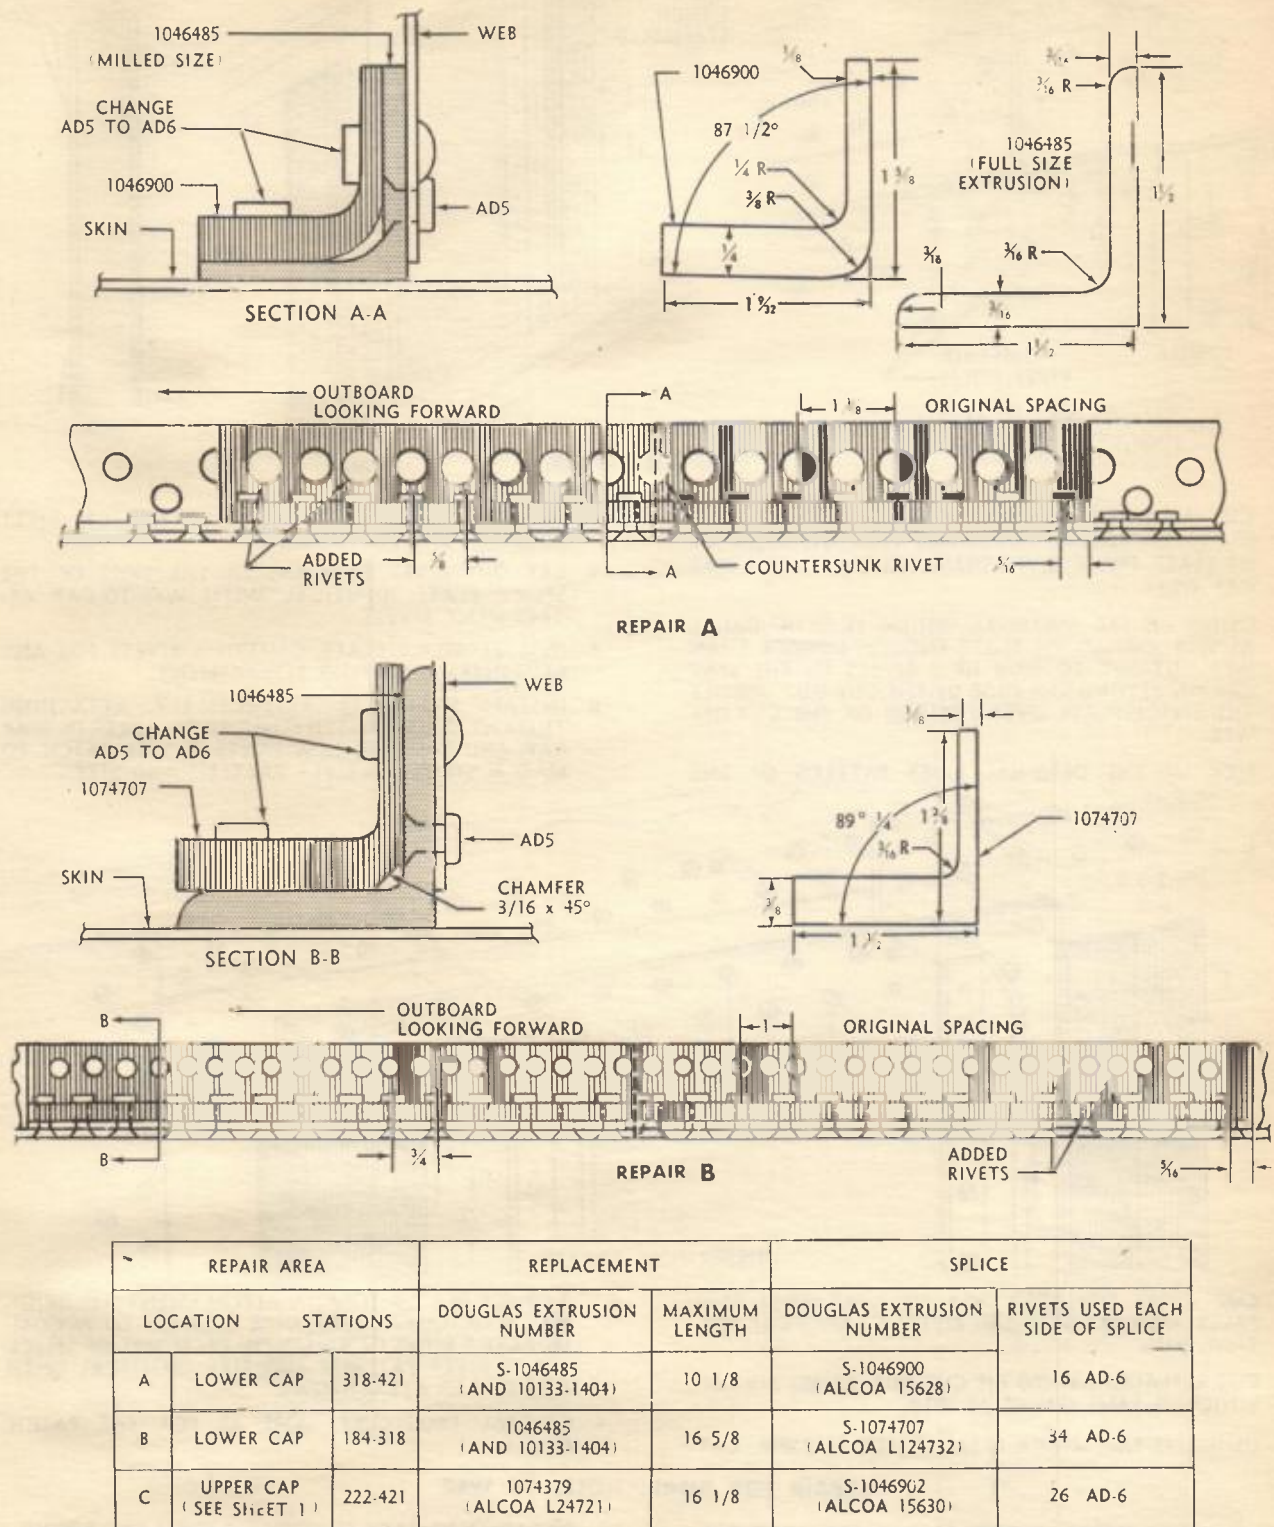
(Sheet 2 of 2 Sheets) - Wing Spar Repair - Rear Spar Caps
